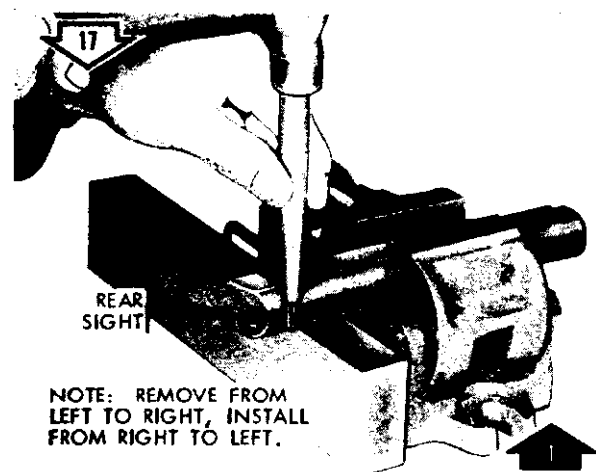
Disassembly/assembly of barrel and slide group (3 of 4).
